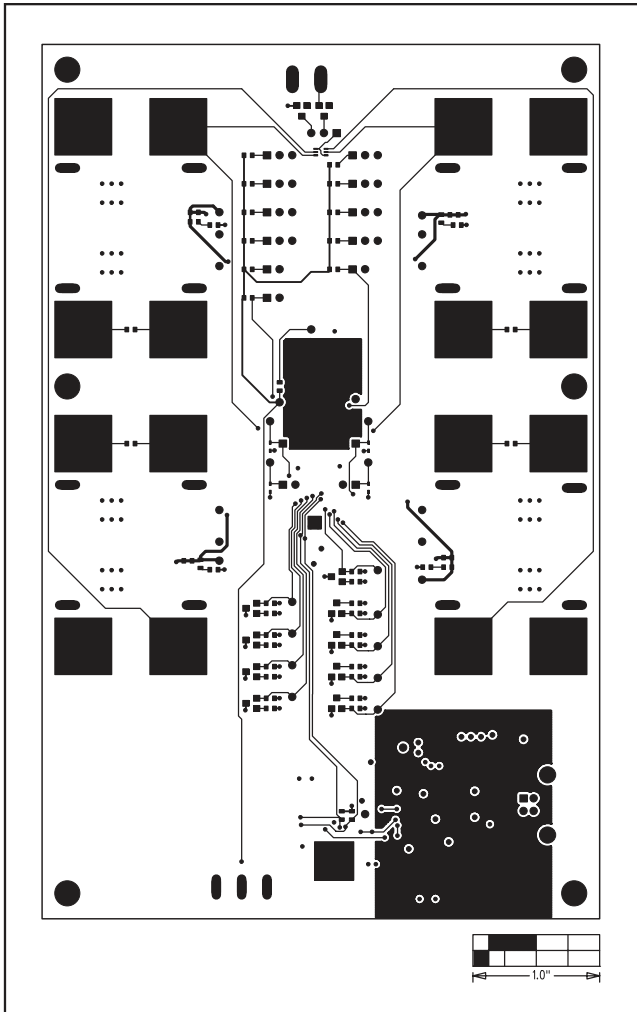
MAX5961 EV Kit PCB Layout—Solder Side
